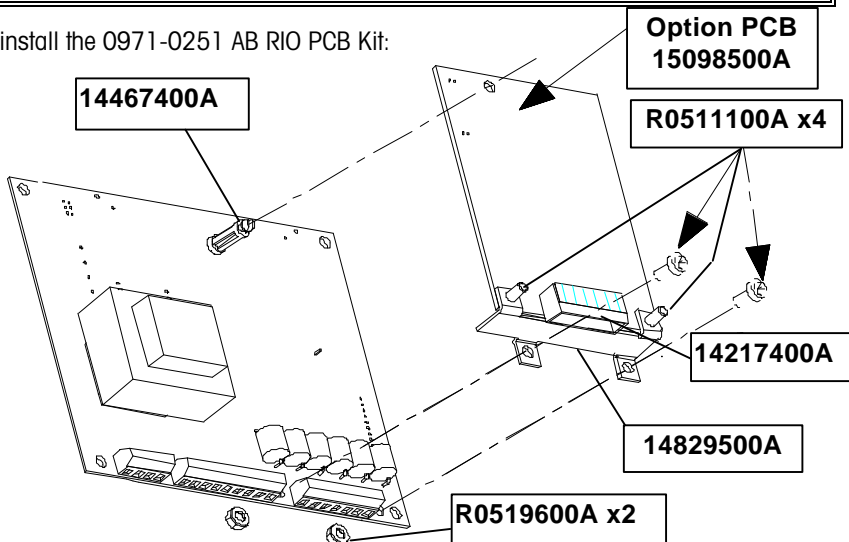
Allen-Bradley PCB Installation in Harsh Environment Enclosure
